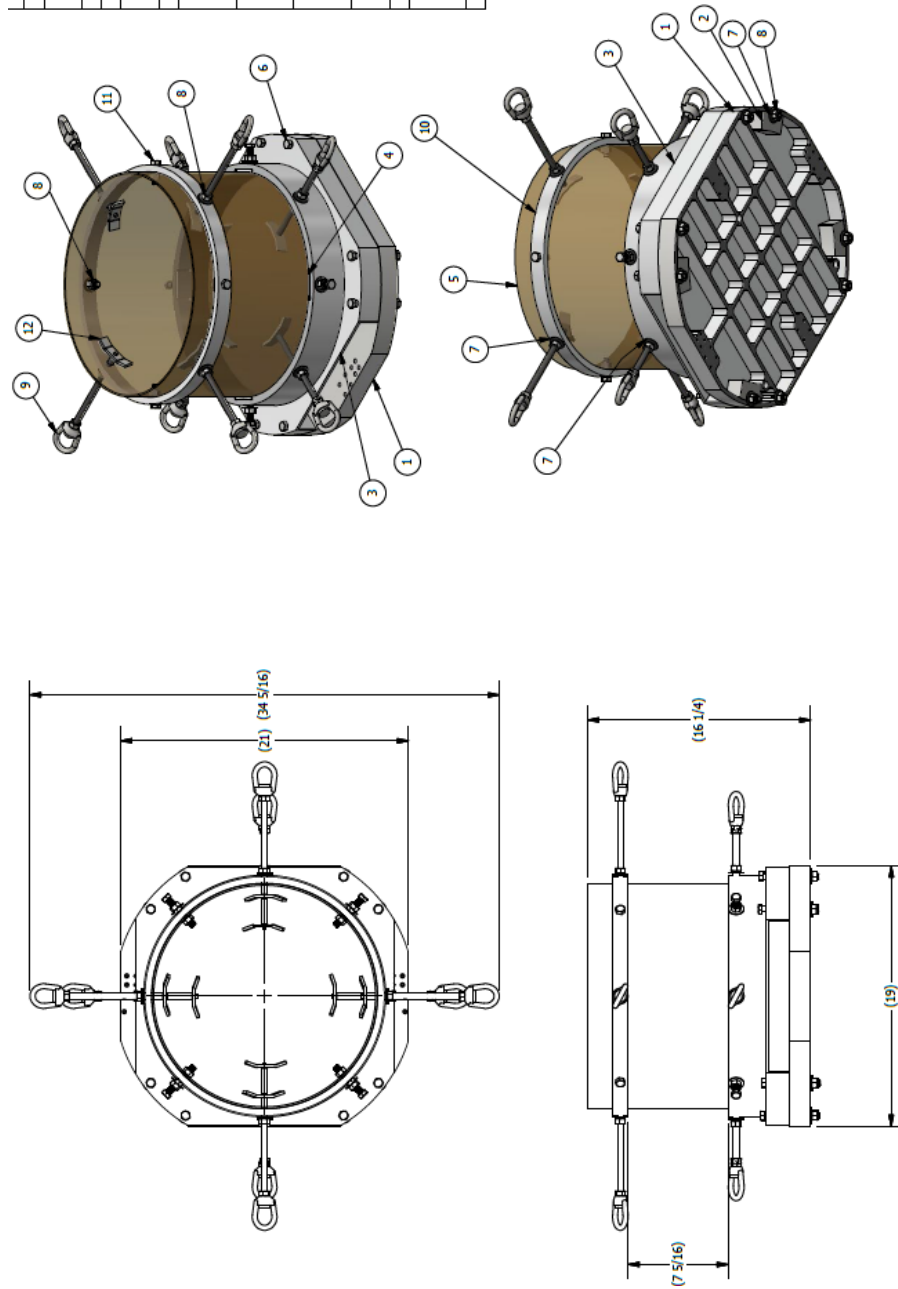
Picture showing the 2D and 3D images of the final assembly of the pelvic holder (measurement units in inch).
